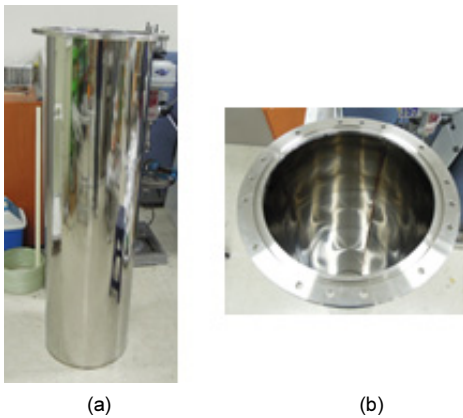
Outer lower shell; (a) final fabrication and (b) flange.
